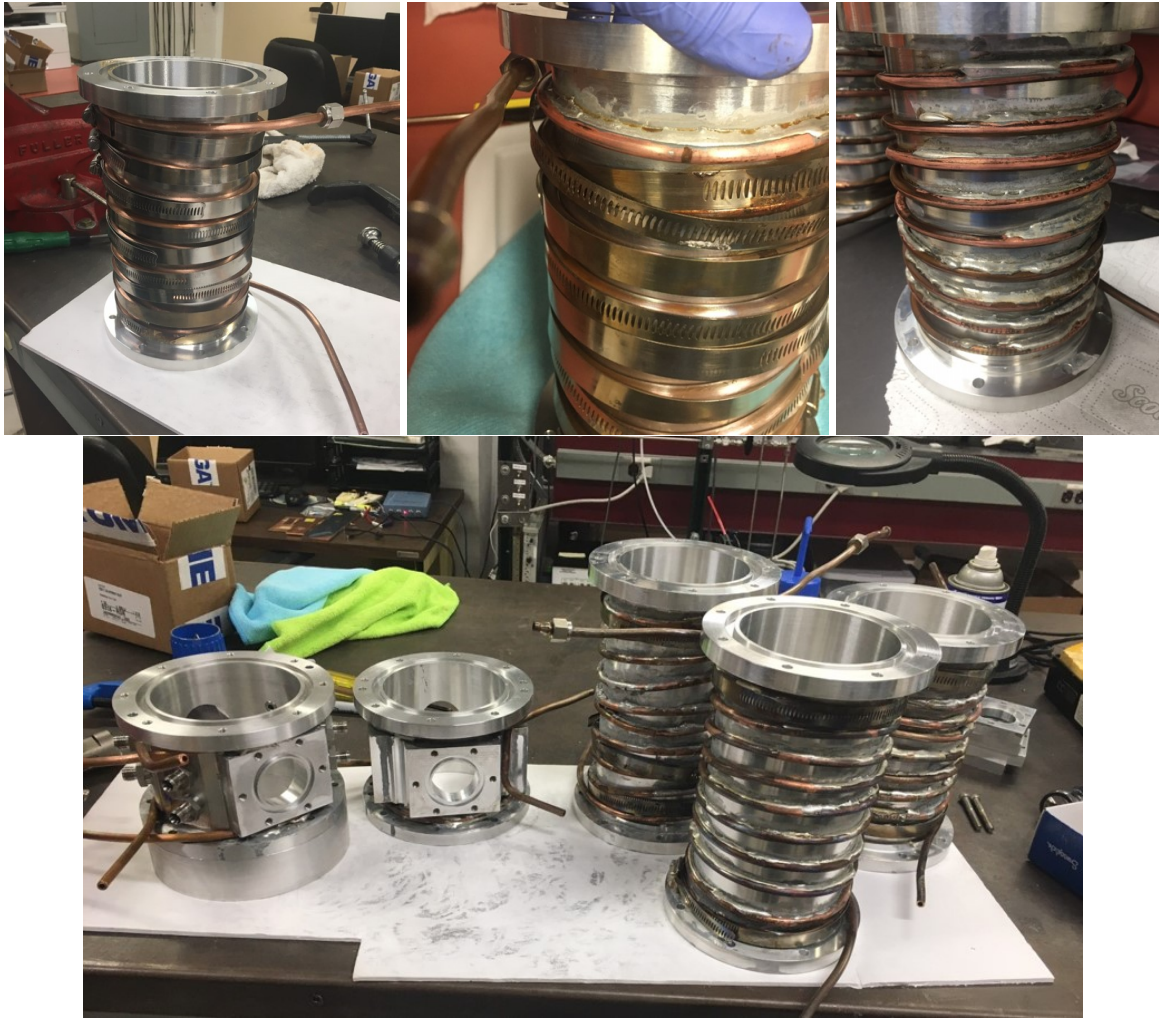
Stages of soldering of aluminum outer tubes and final results. (left) Fixture of tubing coils using hose clamps. (middle) Close-up of one solder joint. (right) Final work piece after all joints soldered and clamps removed. (bottom) All of the soldered outer vessel pieces.
